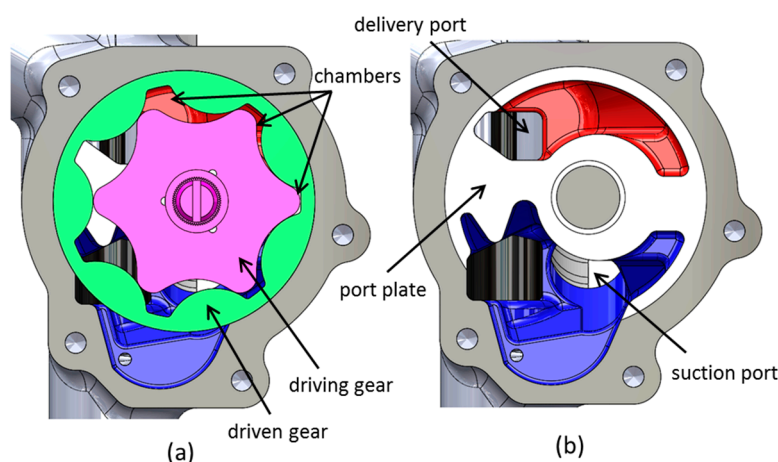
(a) Example of a lubricating gerotor pump; (b) detail of the port plate.
